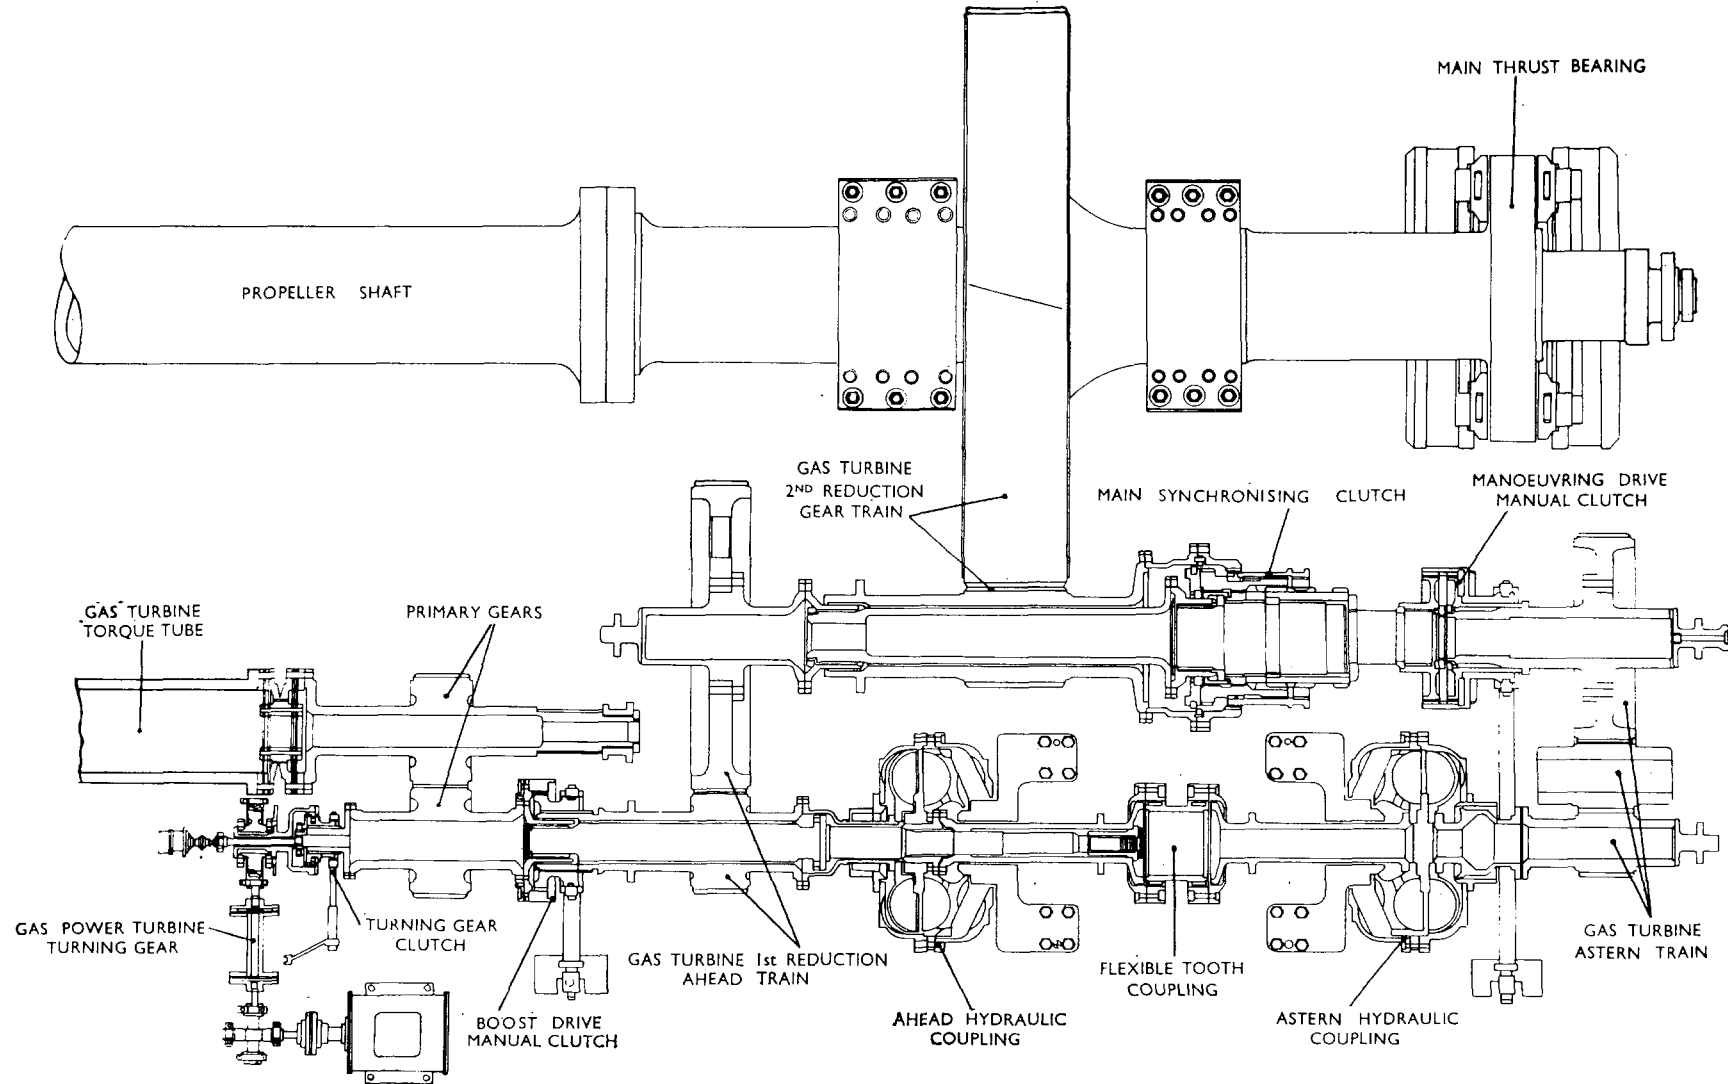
Y.102A—PORT GEARCASE—INBOARD GAS TURBINE GEAR TRAIN
